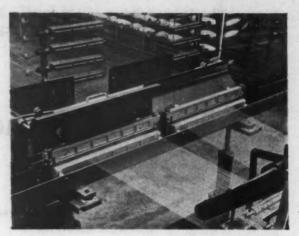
Photo-electric warp inspector installed on a 21-in warping machine
